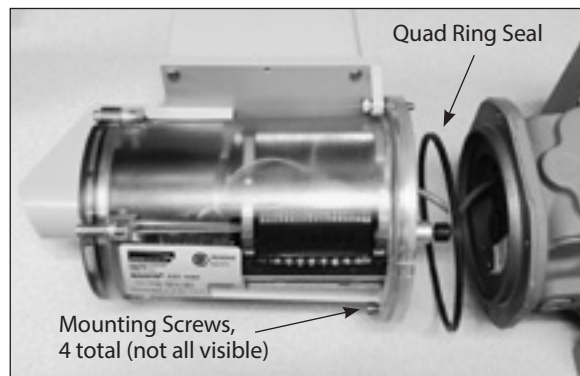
Exploded view of assembling the ES3 on Series B meters
